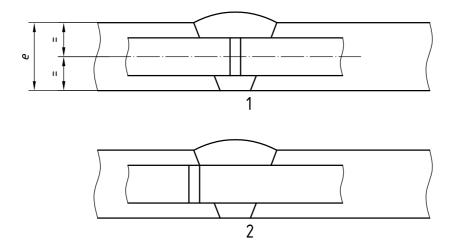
Test pieces for  $e \le 10 \text{ mm}$
